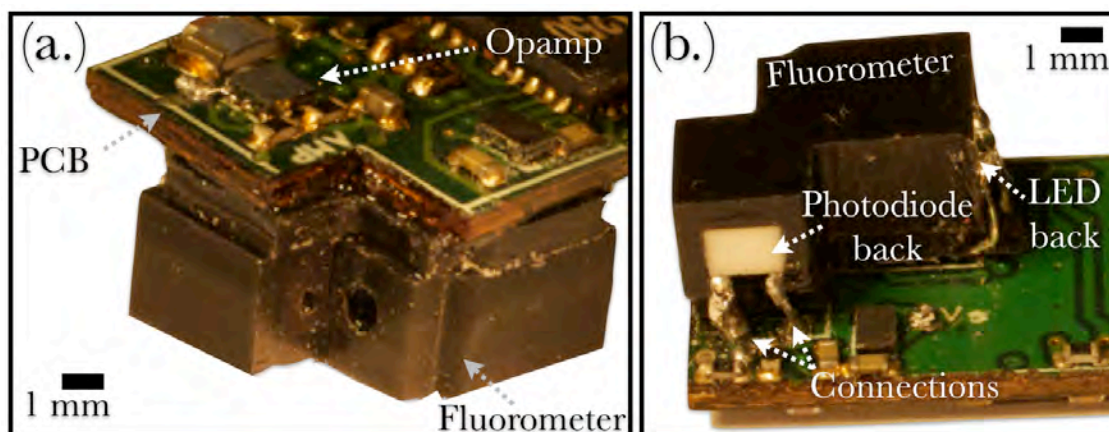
(a.) Fluorometer mounted to the PCB with epoxy. (b.) Electrical connections made between the LED, photodiode, and corresponding PCB pads.
